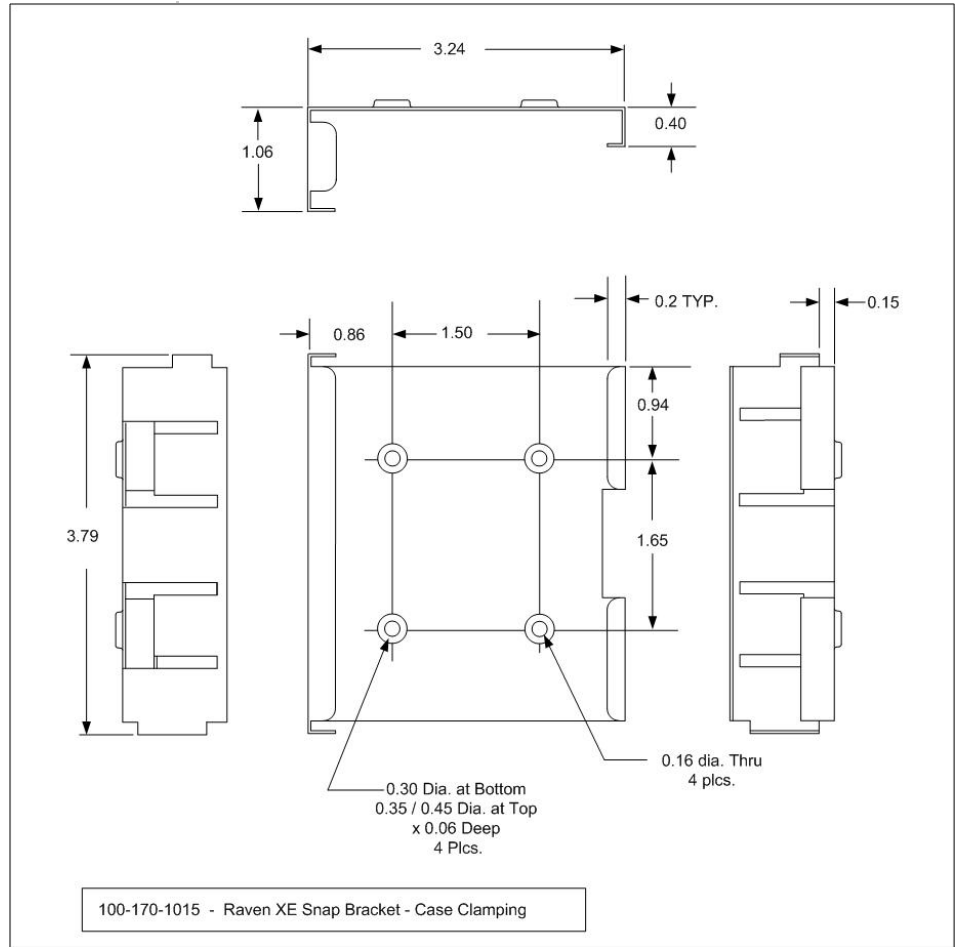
100-170-1015 : Mounting Bracket for Raven XE
